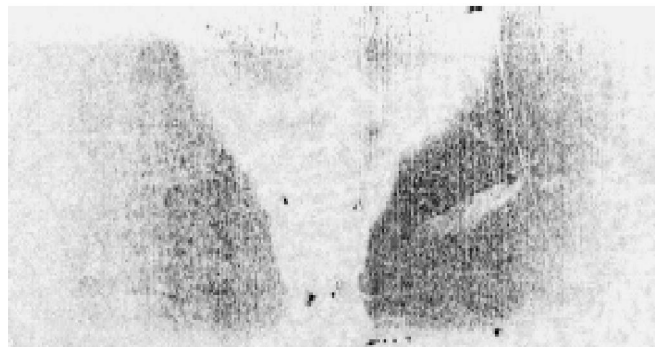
Macrograph of 20mm thick joint welded using MAG welding process and 75°C preheating.
